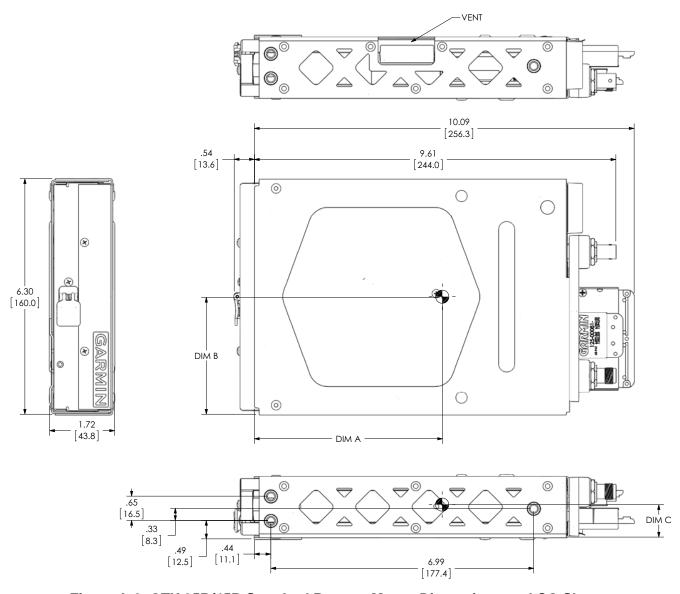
GTX 35R/45R Standard Remote Mount Dimensions and CG Shown
